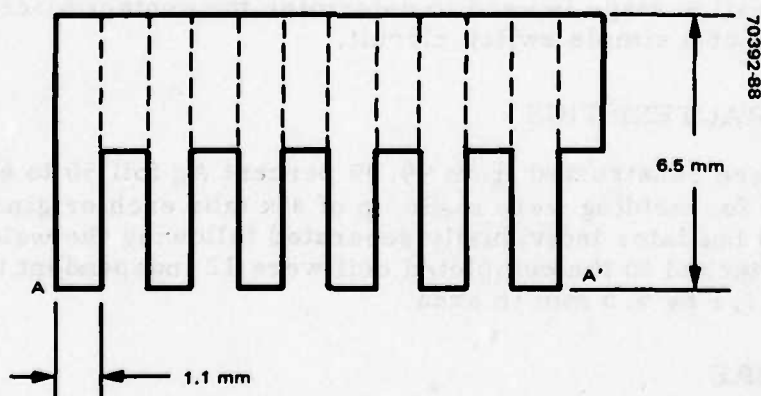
SILVER FOIL PATTERN CONSISTING OF SIX TABS
